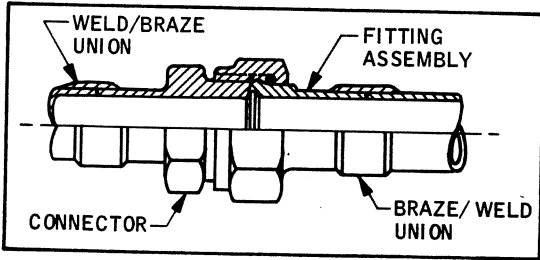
IN-LINE WELD/BRAZE DYNATUBE® CONNECTION
